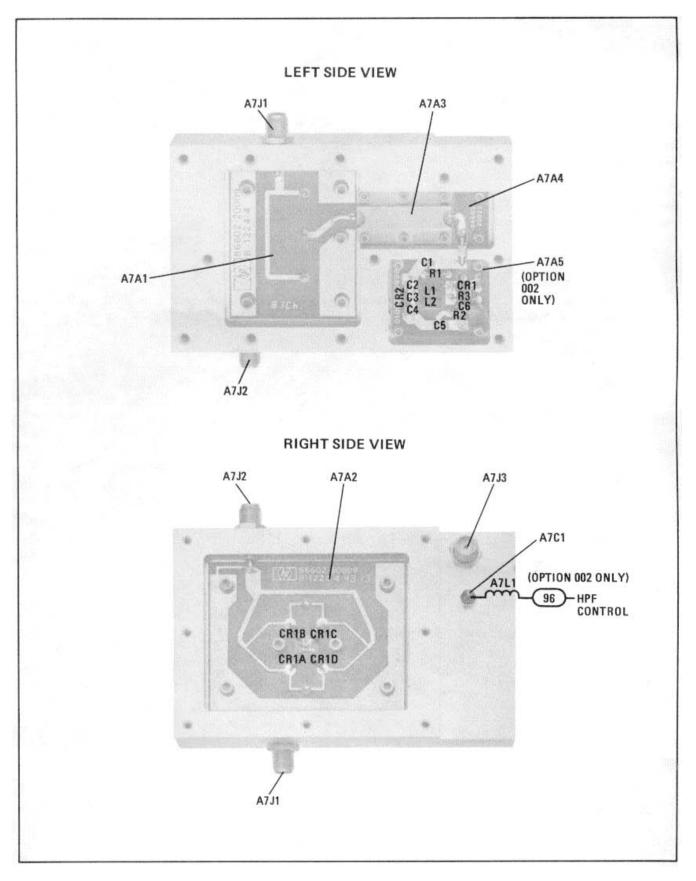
A7 Mixer Assembly's subAssembly and Component Locations
